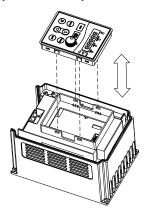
schematic diagram of keyboard disassembly (0.75kw - 7.5kw, including 11kW P machine)
